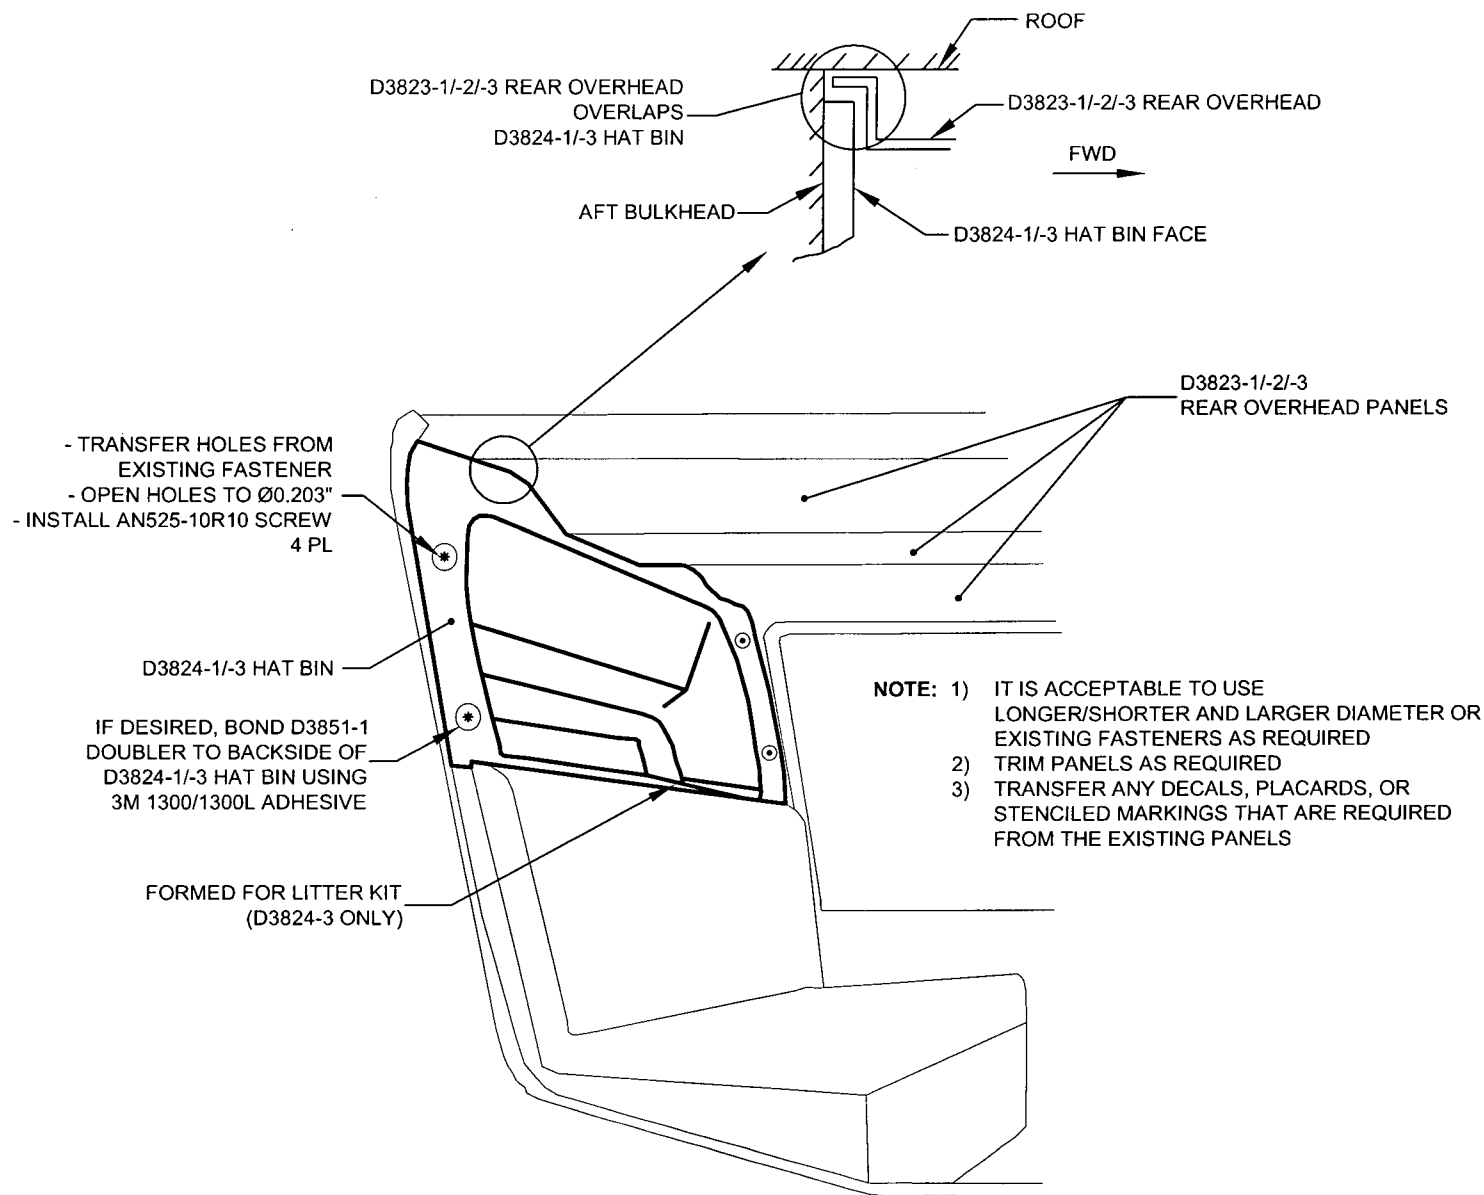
D3824-1 HAT BIN INSTALLATION SHOWN (D3824-3 SIMILAR)
